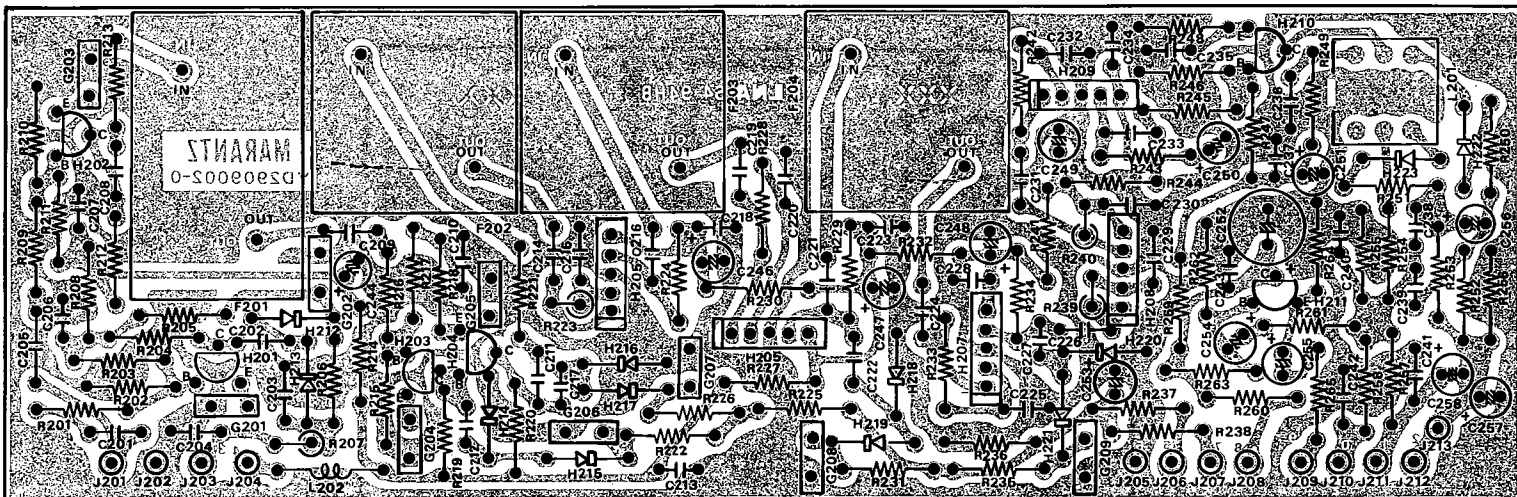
FM IF Amplifier Assembly P201 Component Locations
